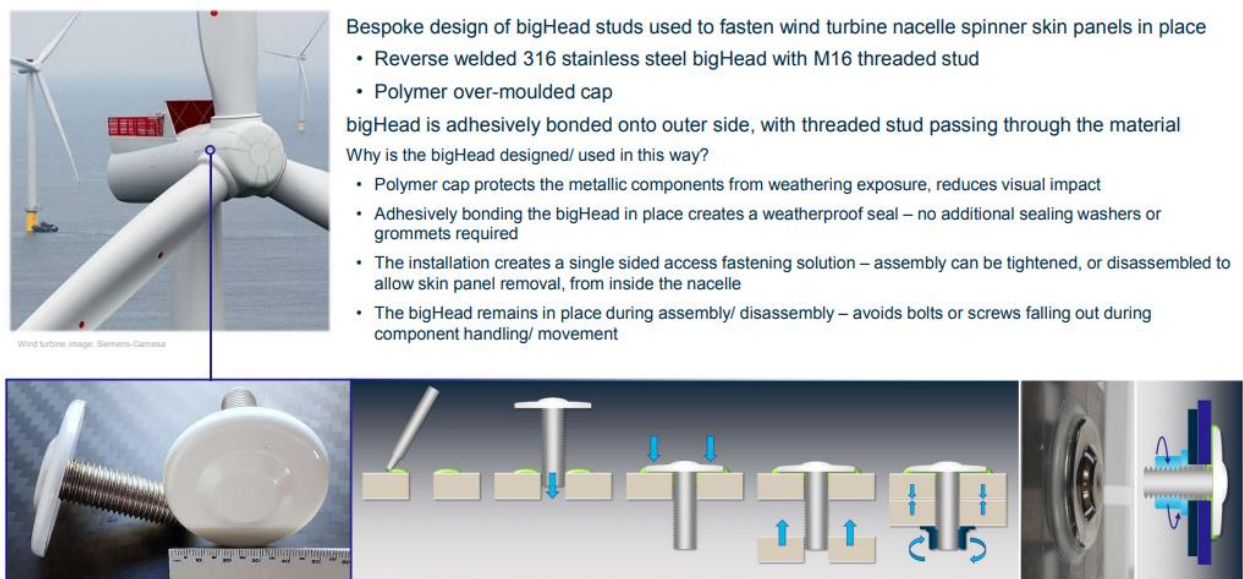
Example of application and mechanism behind a surface bonded fastener
